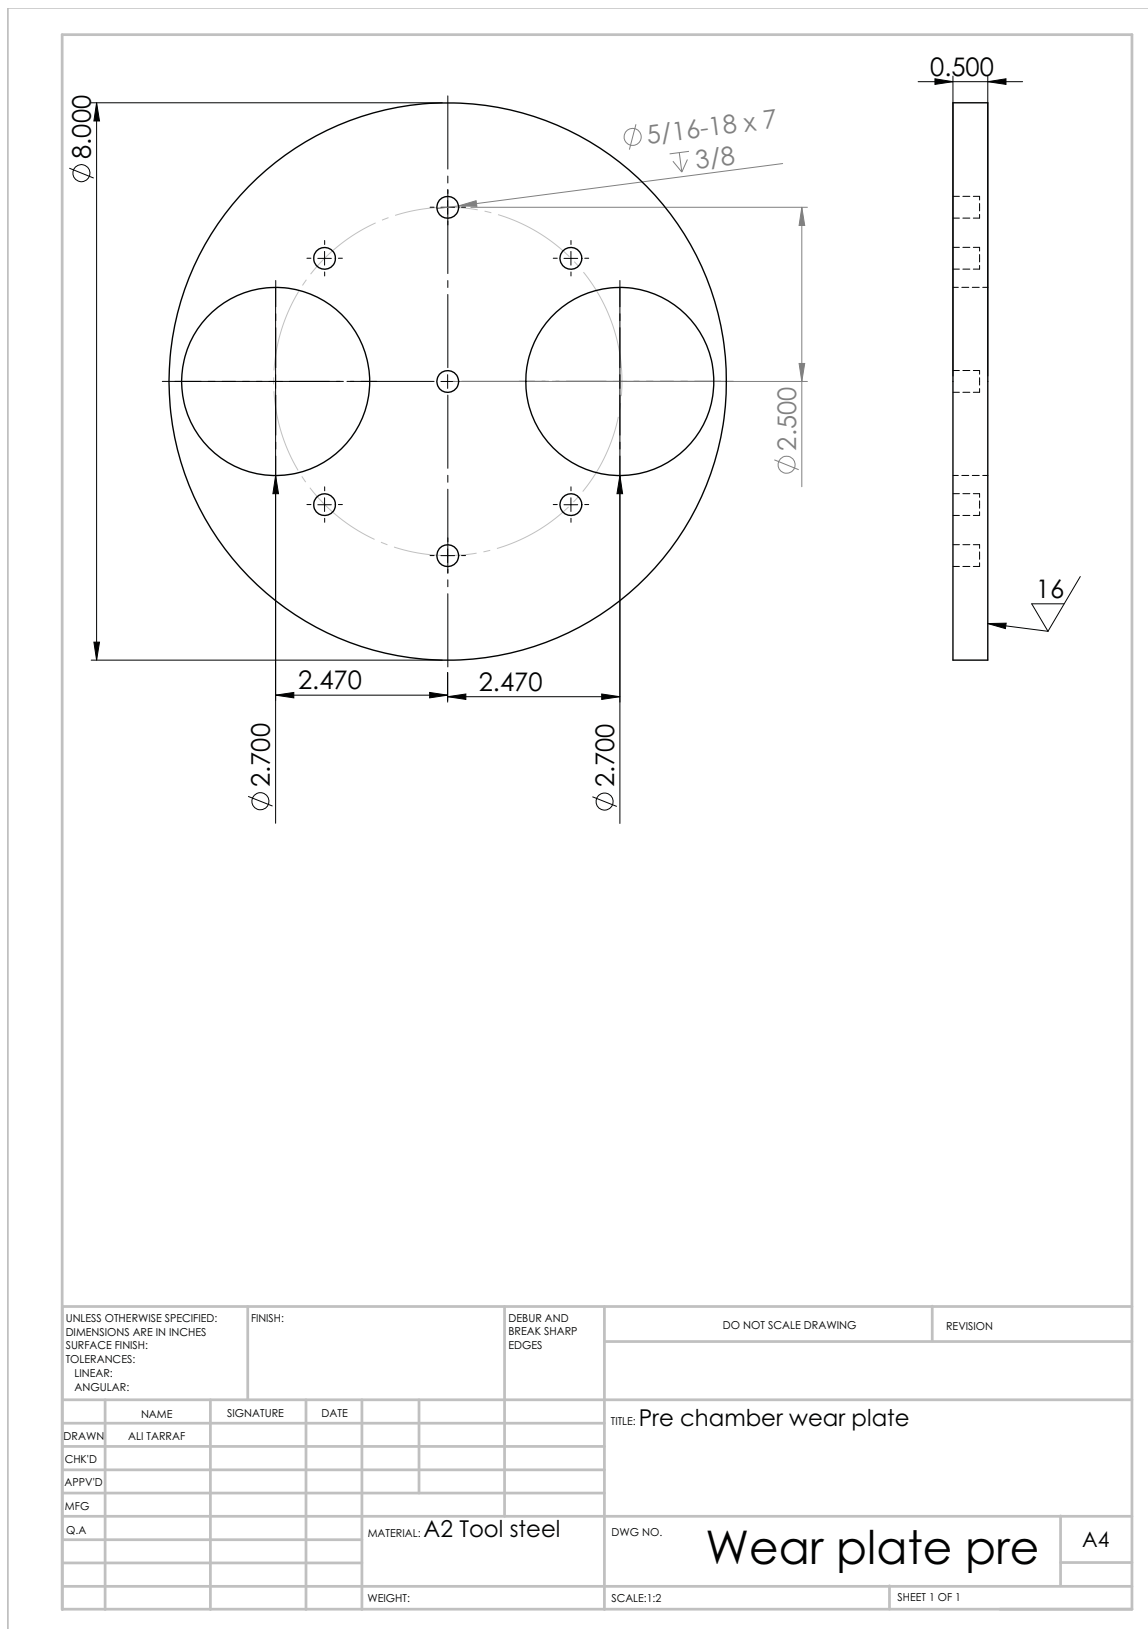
Wear plate machined out of A2 tool steel for the pre-chamber
